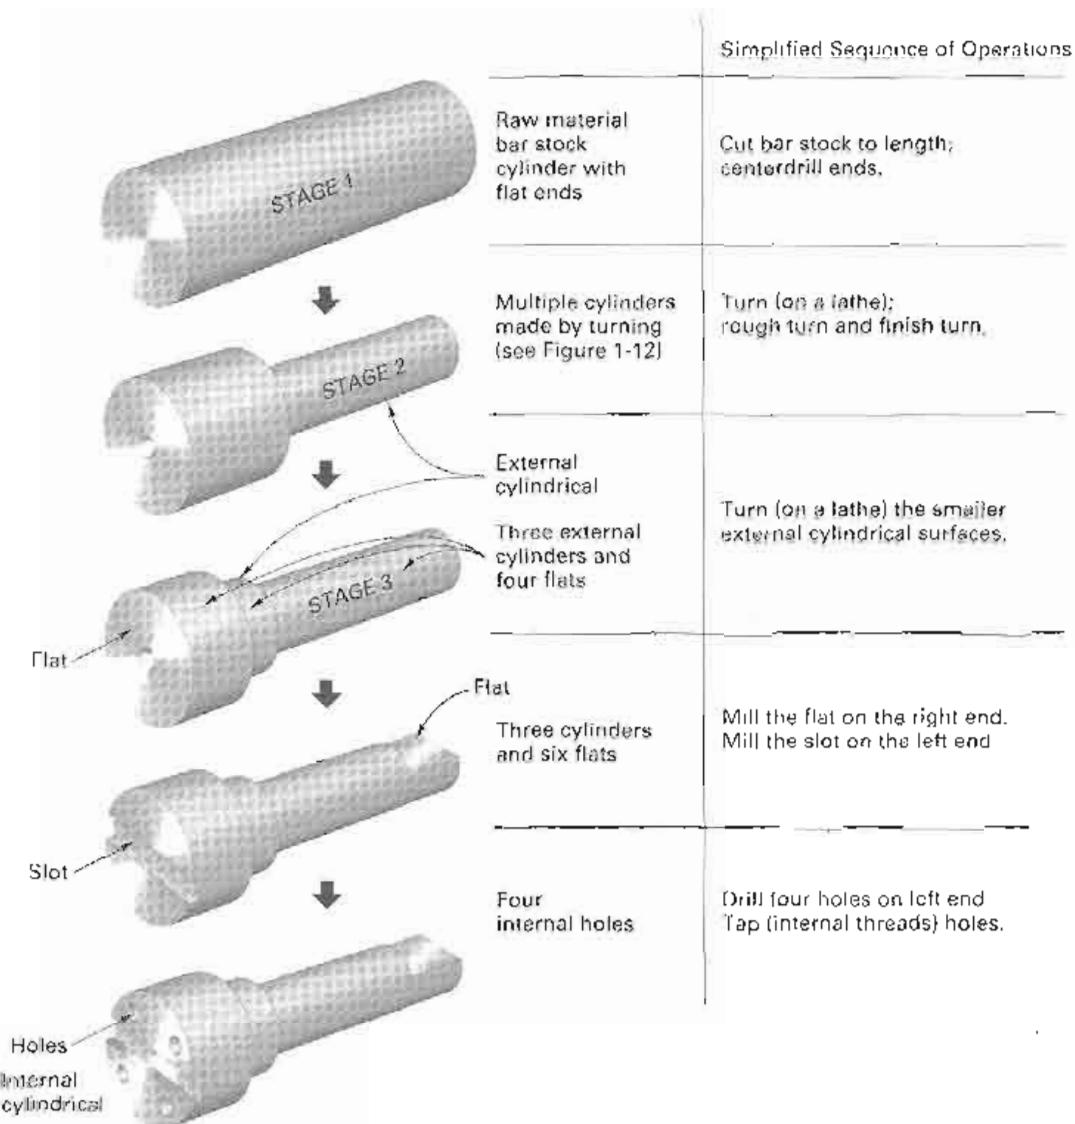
The component called a pinion shaft is manufactured by a “sequence of operations” to produce various geometric surfaces. The engineer figures out the sequence and selects the tooling to perform the steps.
